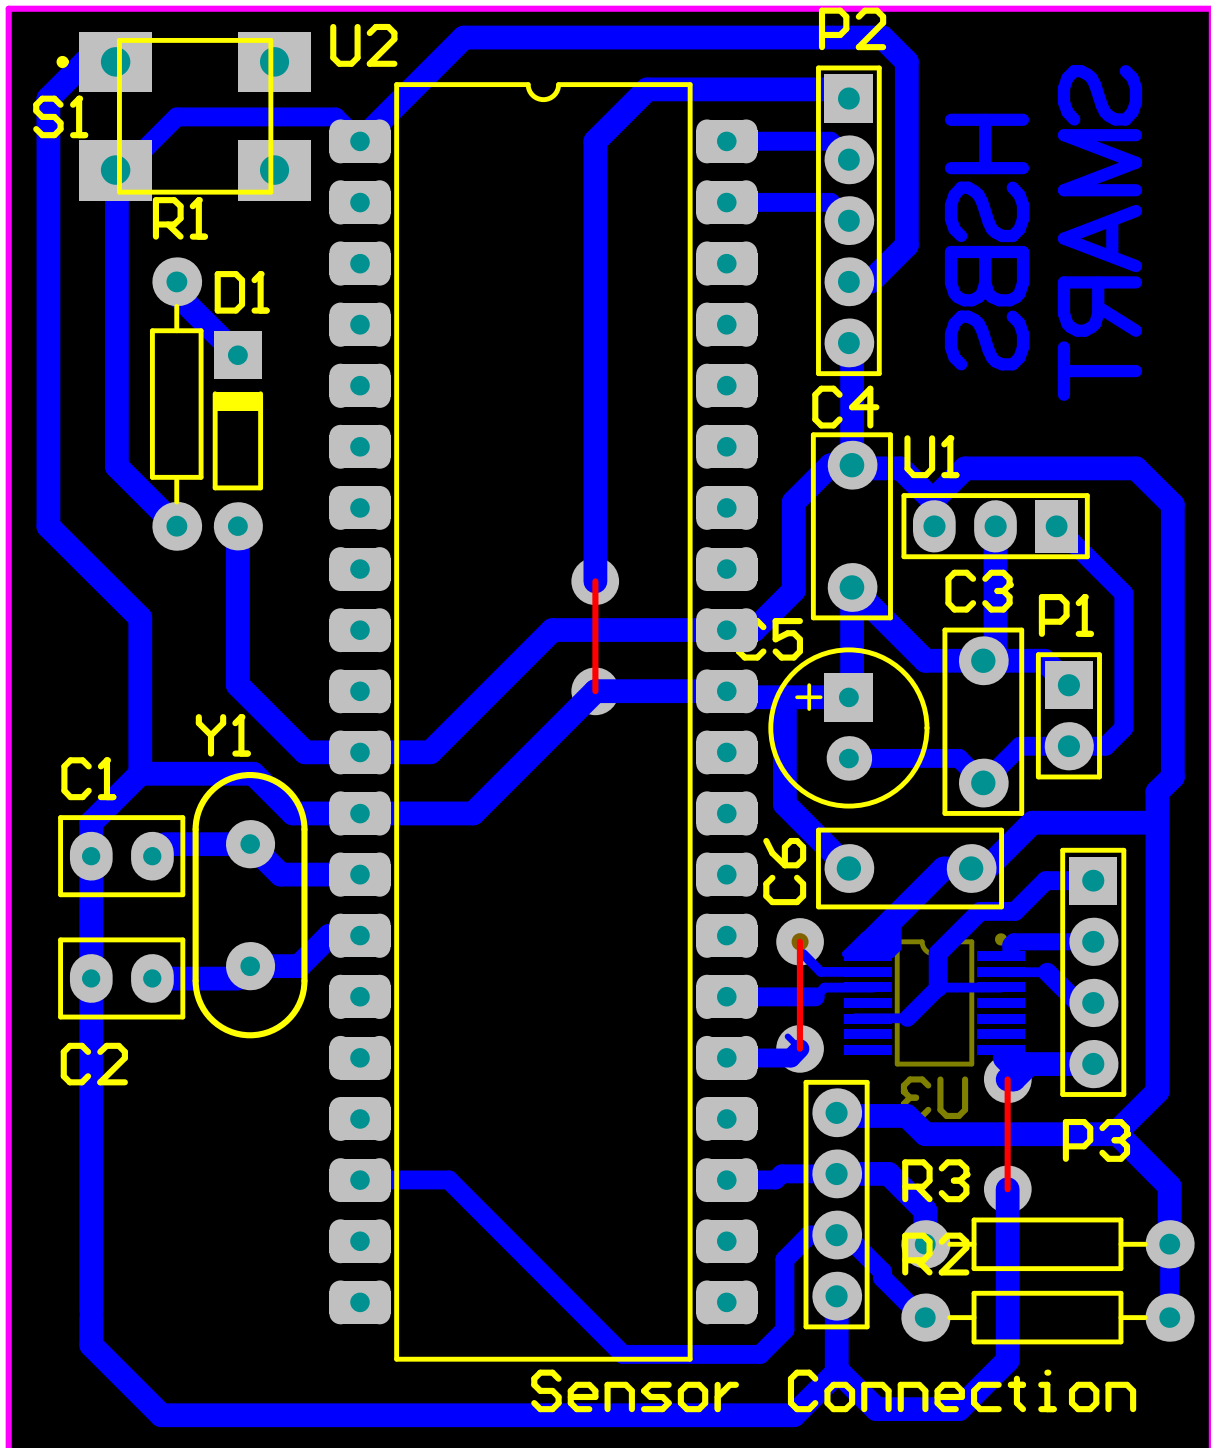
Printed Circuit Board (PCB) Design (v1.0)
